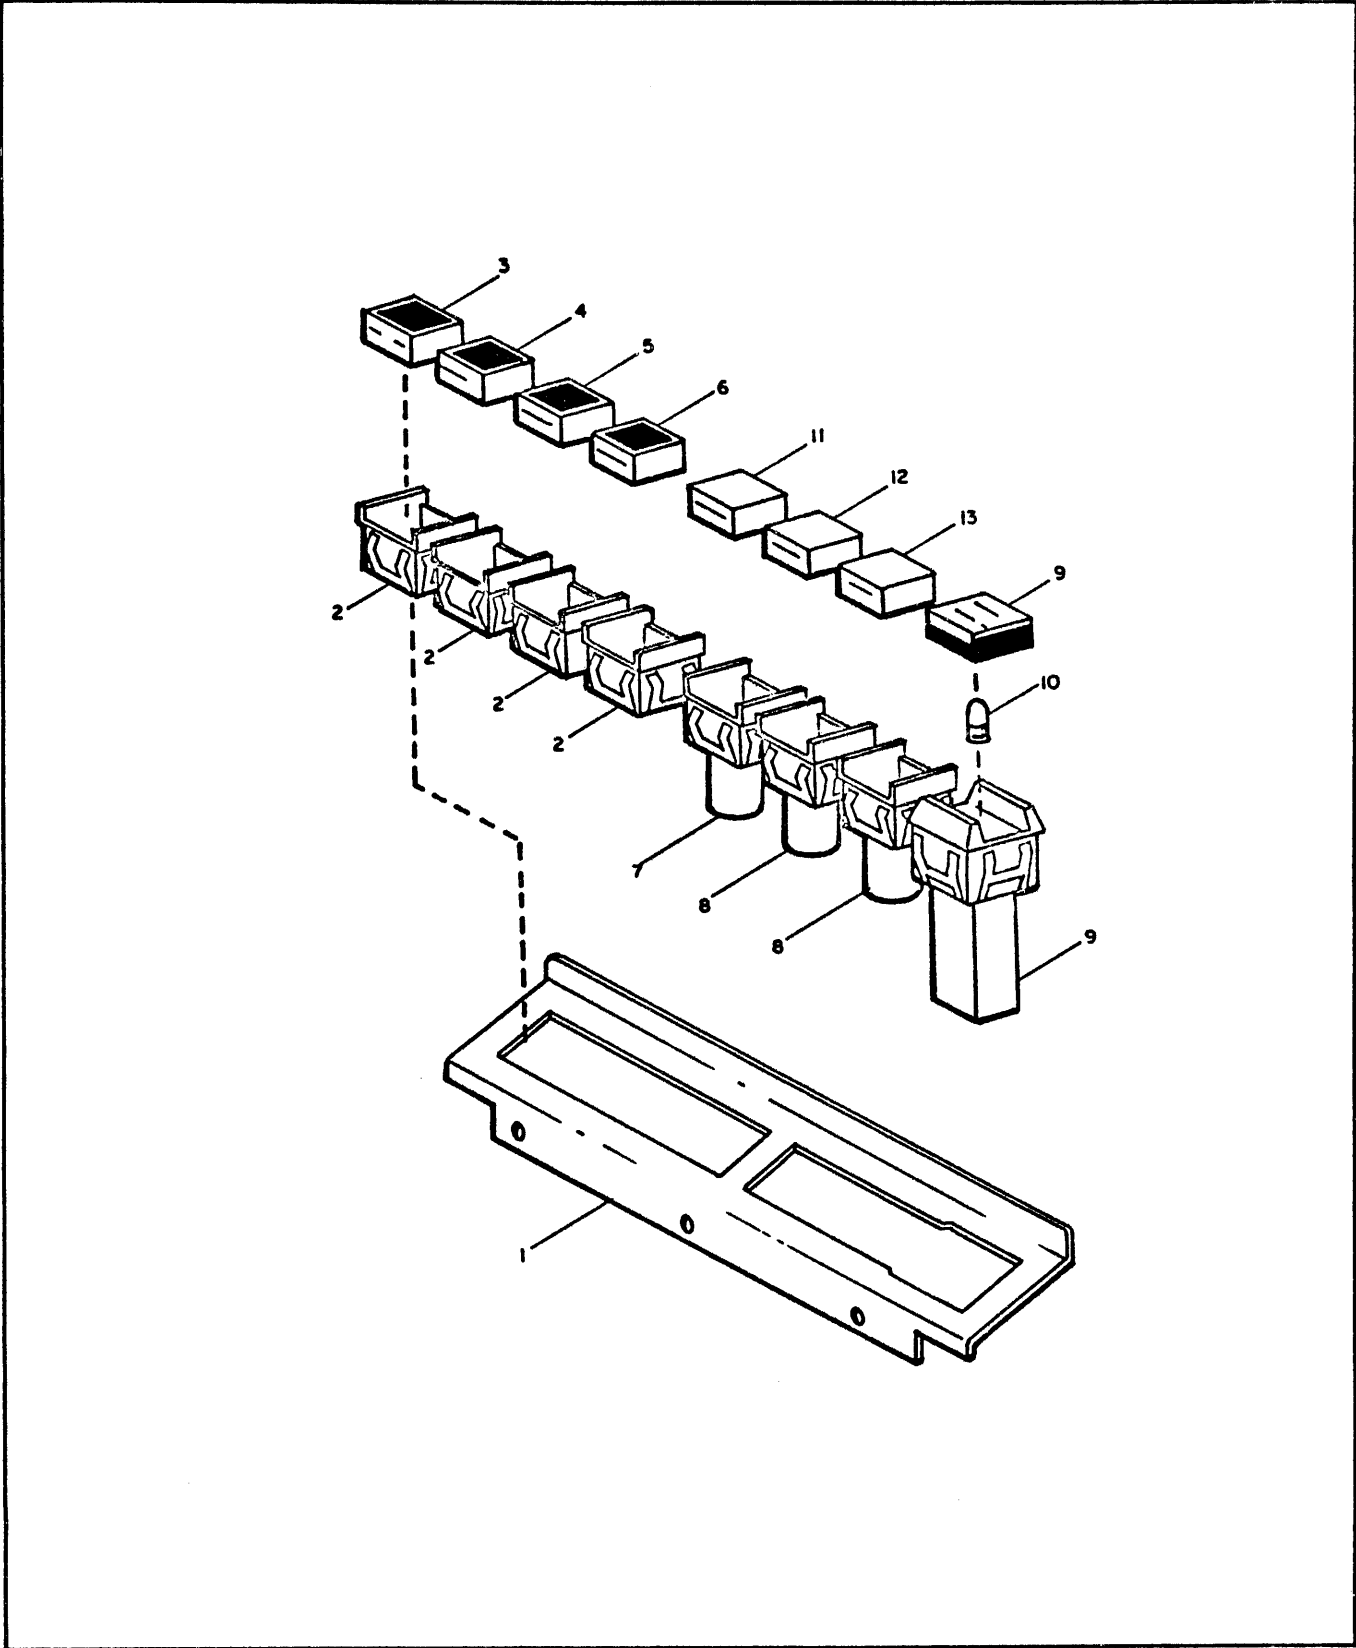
CONTROL PANEL ASSEMBLY
